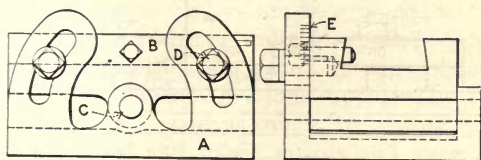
Fixture for holding dies while grinding sheared faces.
